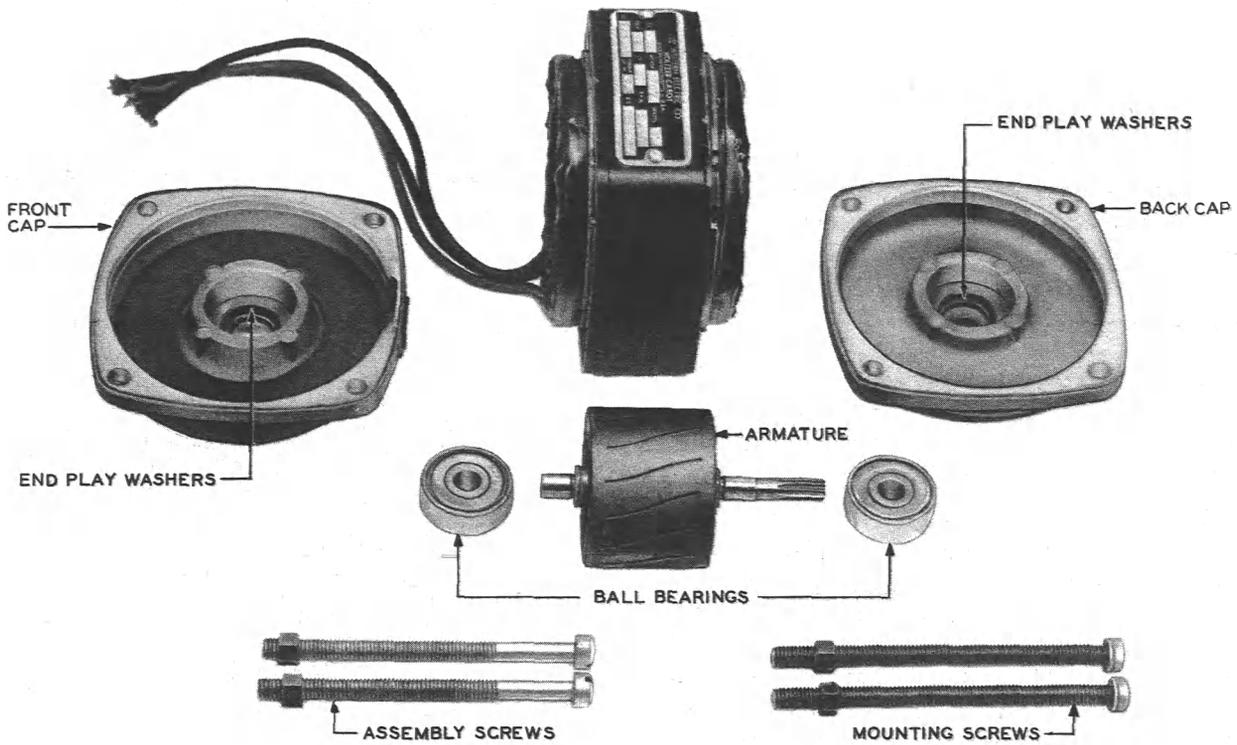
Ball-bearing Motor Parts (Holtzer-Cabot)
